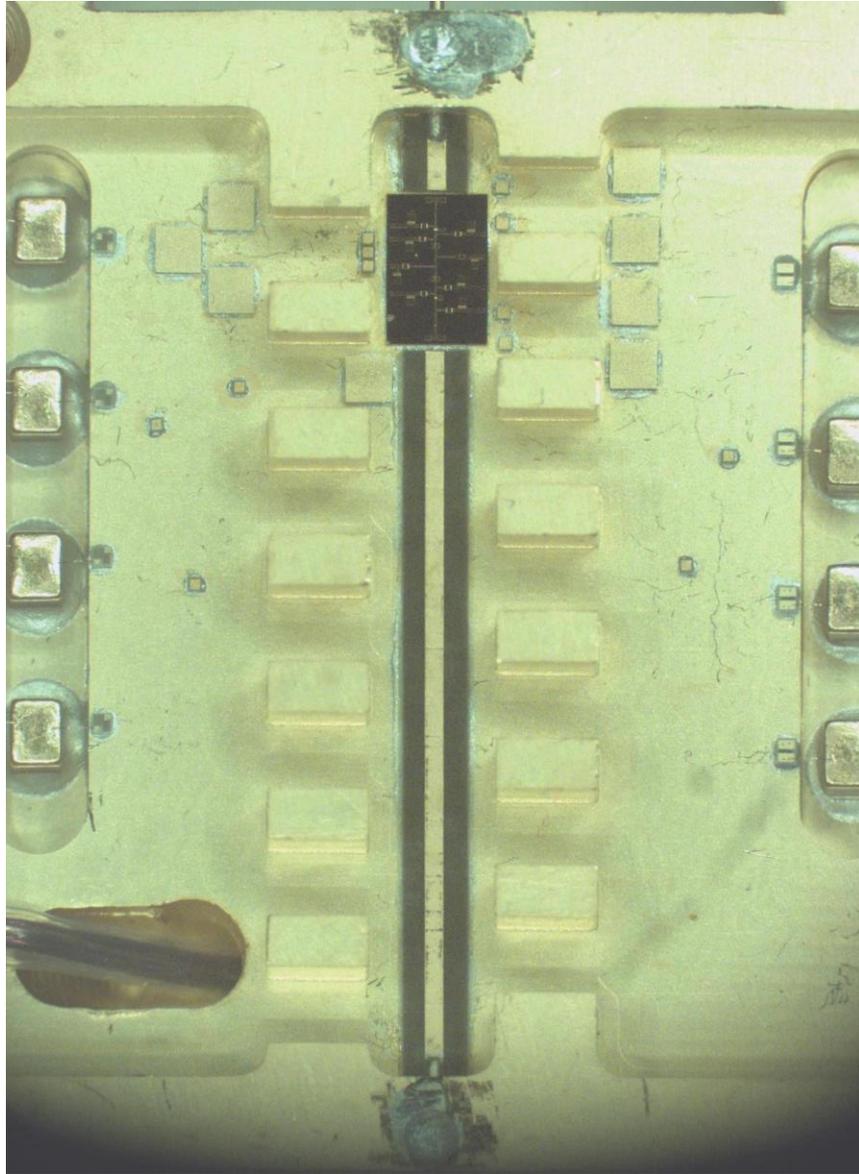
Packaged Q band MMIC inside the Q band chassis.
